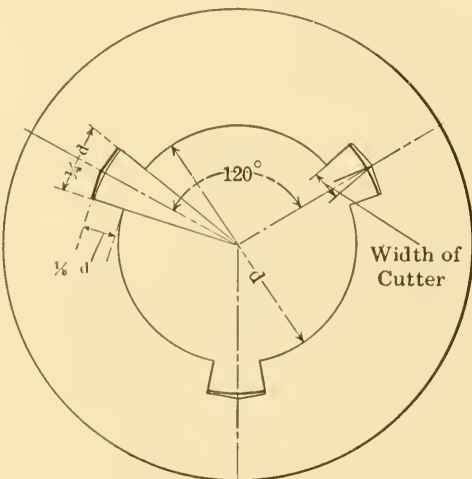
KEYWAYS FOR HEAVY SLIDING GEAR.
